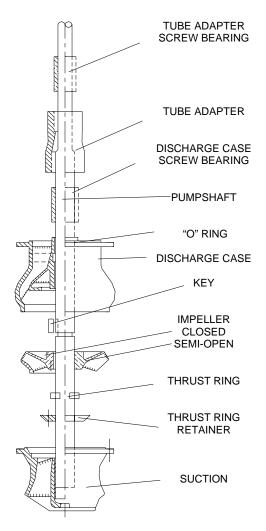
Oil Lubricated Bowl Assembly Installation Semi-Open Enclosed Impeller/Keyed Construction
